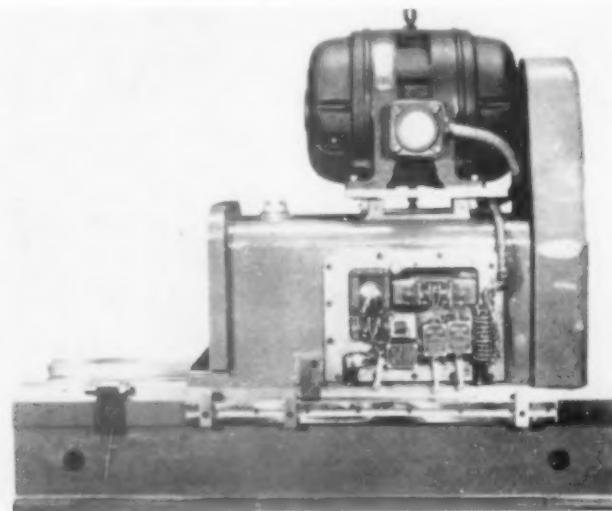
illustrates a drillhead, with the hydraulic enclosure removed, from the machine shown in Fig. 6.
